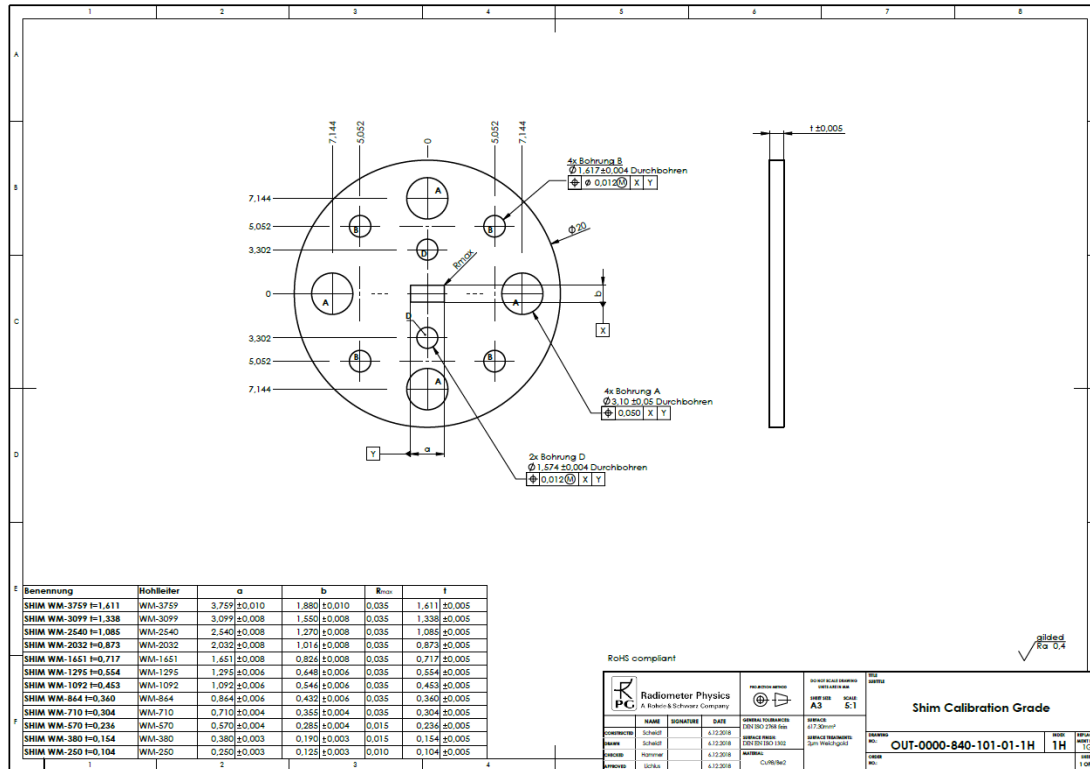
Outline Drawings of the WM Shims with mechanical tolerances
